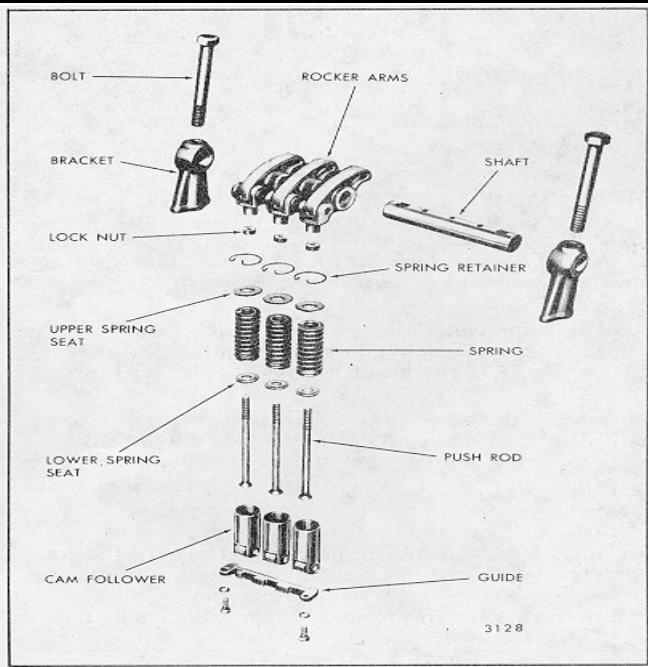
Valve and Injector Operating Mechanism and Relative Location of Parts
